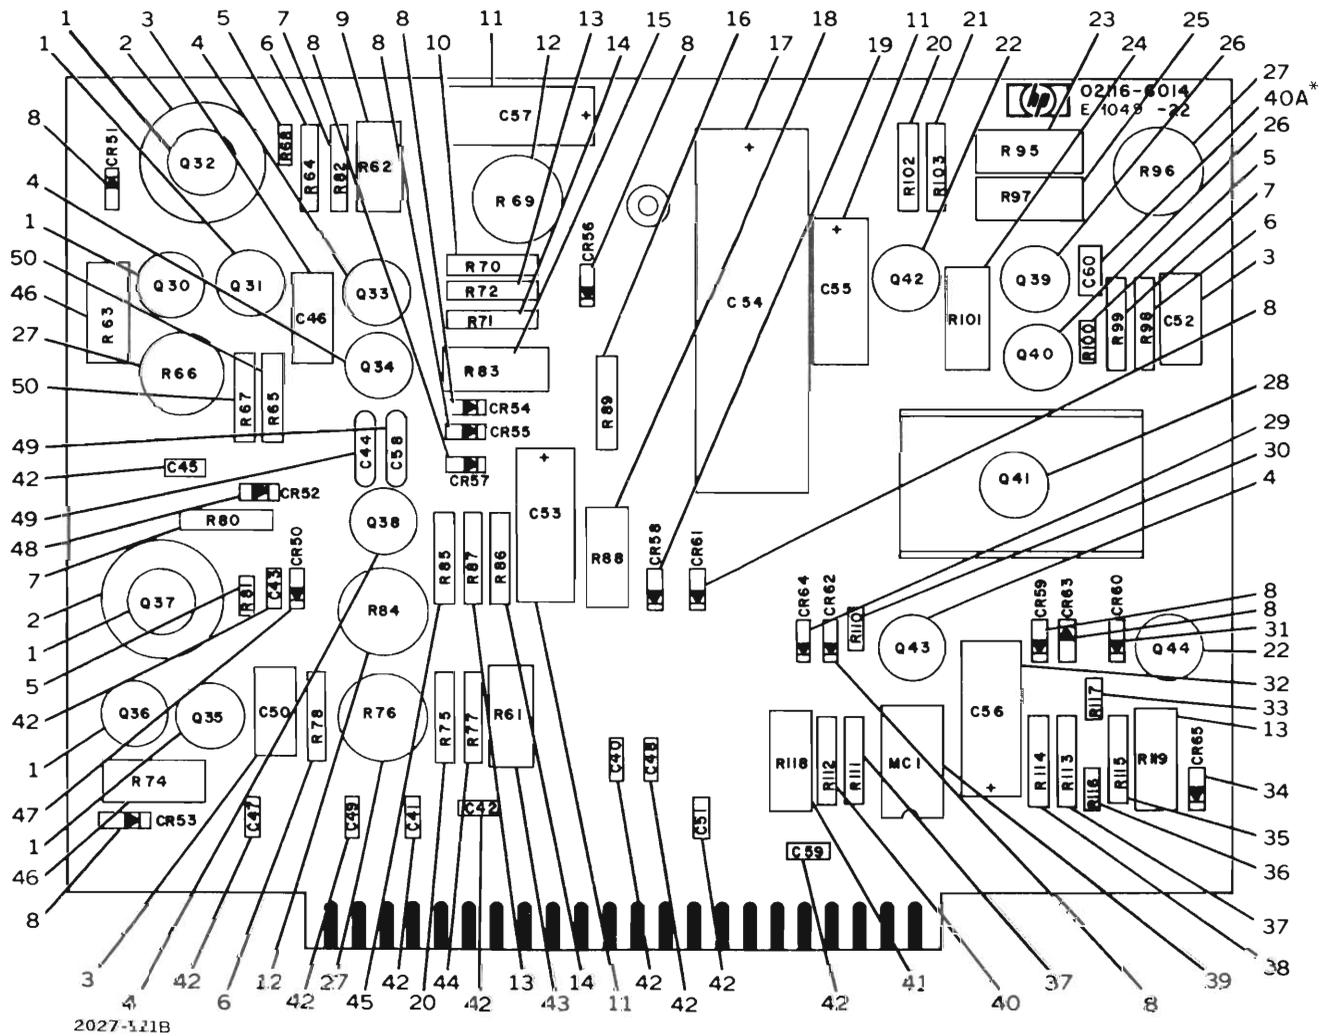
A300 Power Supply and Back Panel Assembly (02116-63217), Replaceable Parts
